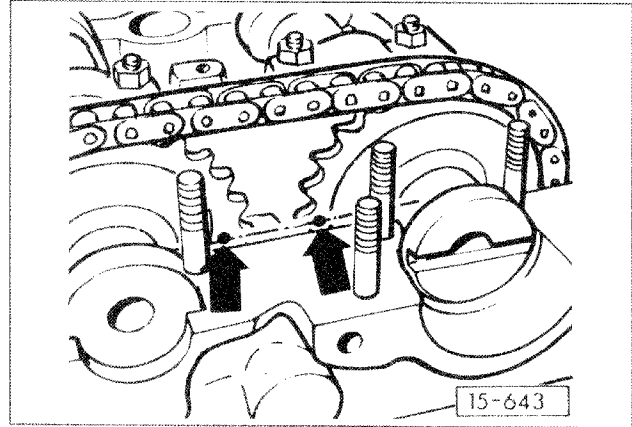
Camshaft chain sprocket timing marks on PL (16-valve) engine. Marks should align with each other and cylinder head top surface.
